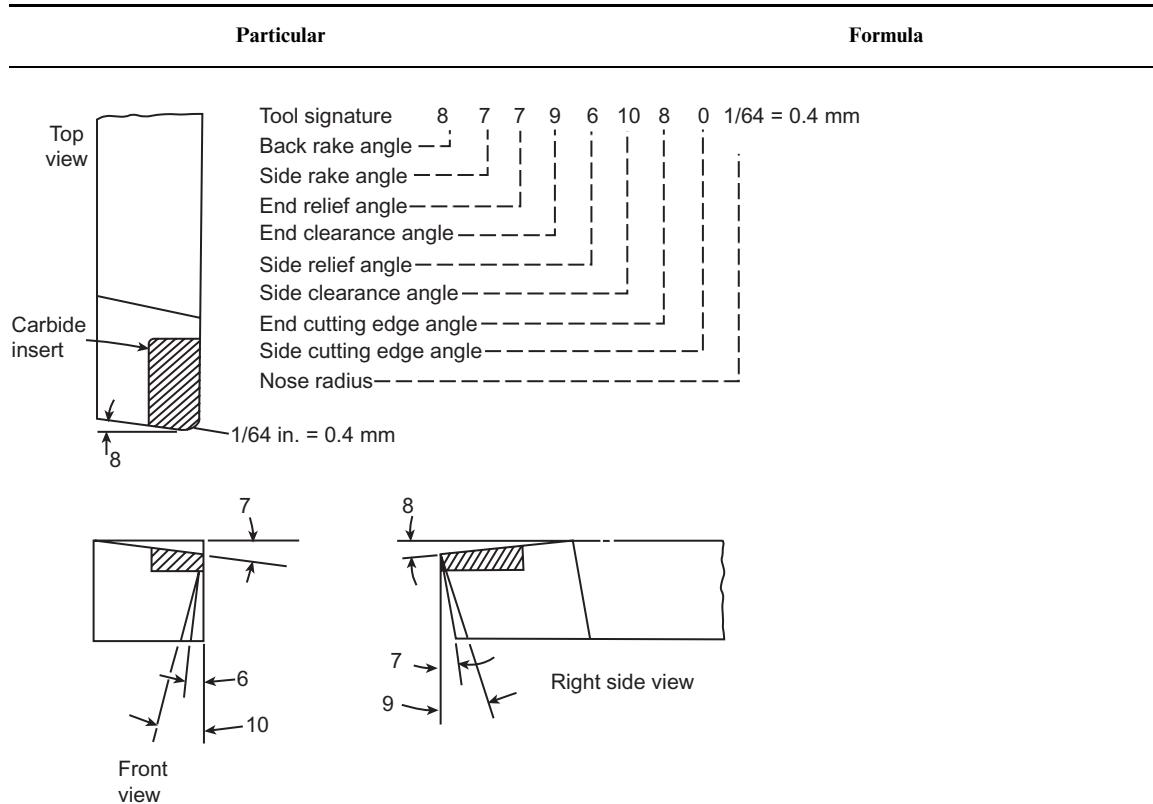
A straight shank, right cut, sintered carbide tipped, single point tool. Rake angles are negative. *Courtesy: American Society of Tool and Manufacture Engineers, Fundamentals of Tool Design, Prentice Hall of India Private Ltd., New Delhi, 1969.
